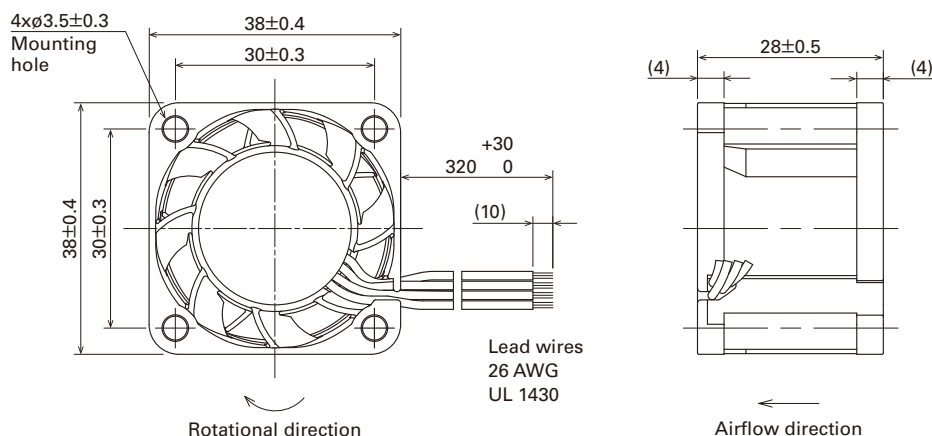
Dimensions of 38 × 38 × 28 mm *San Ace 38 9HVA* type (Unit: mm)
